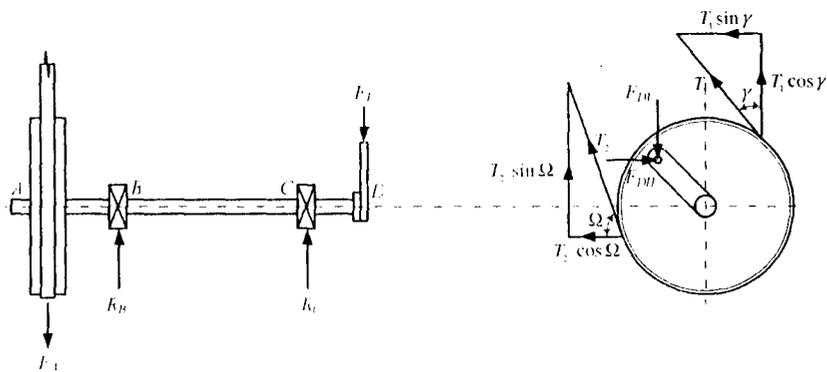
Components on Shaft 2 (Chipper Shaft)
